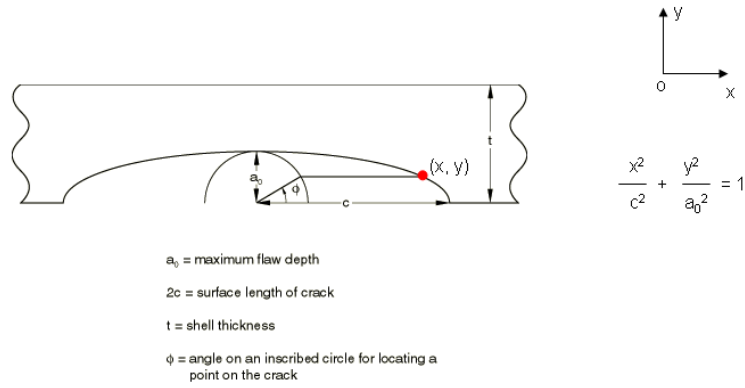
Representation of the weld defect crack with a semi-elliptical profile.
